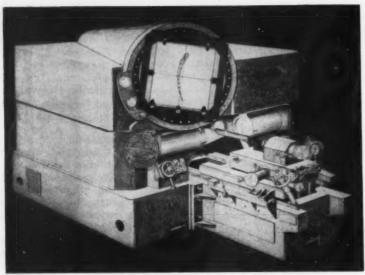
Section-profile projector developed by Eastman Kodak Co. for rapid, accurate mass inspection of turbine blades
